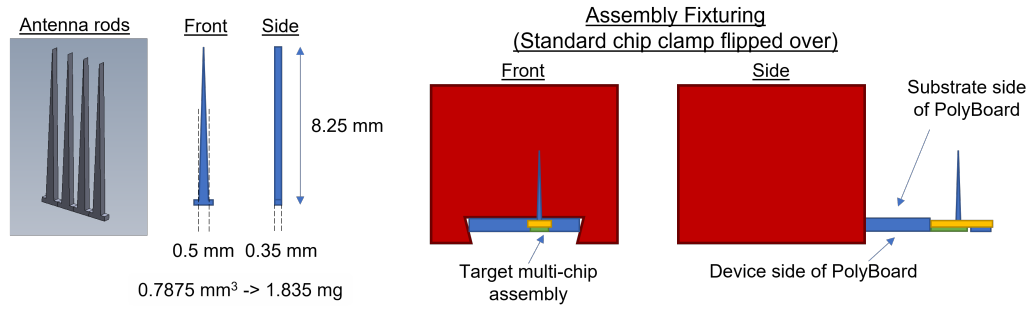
Schematic of antenna rod (single and 1×4 array) and assembly fixturing
